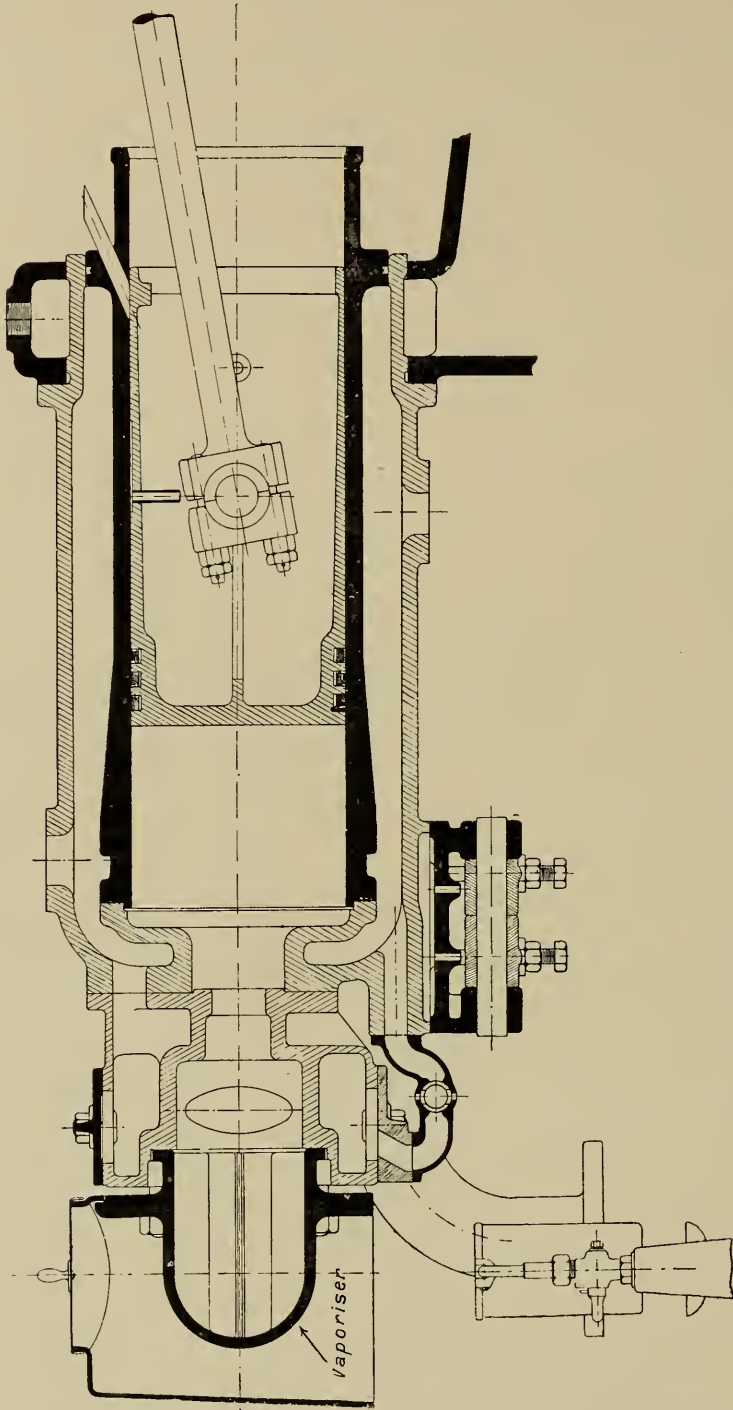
Section of cylinder and vaporizer—Hornsby Oil Engine.
